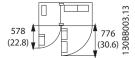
Space in front of IP21/IP54 enclosure type, frame size
